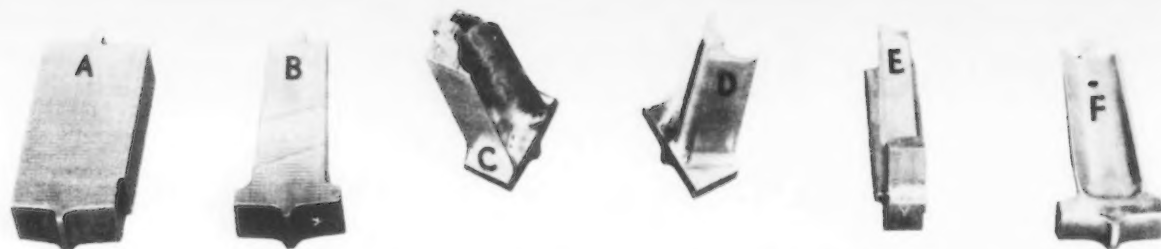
Turbine buckets are milled from heat treated 16-25-6 high temperature steel bar stock. These are the milling and finishing steps.
